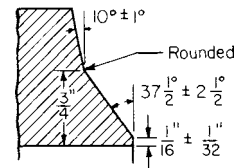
Recommended end preparation for pipe wall thickness greater than 3/4 in.
